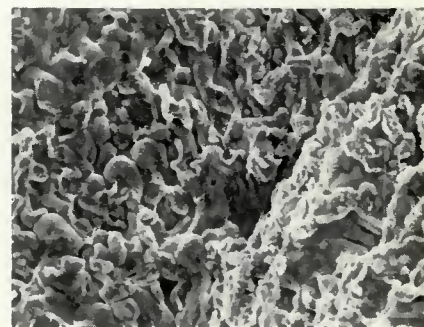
Fracture surface obtained in the Varestraint test with filler metal type 25/22/2.1/N/4.5Mn.  $\times 800$  (reduced 46% on reproduction)
